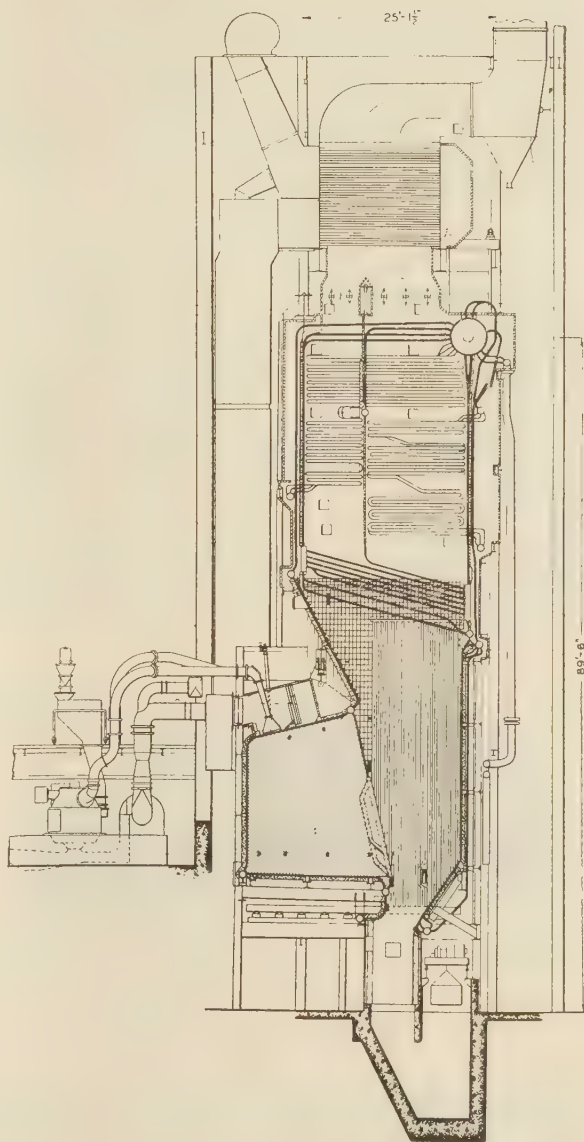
CROSS-SECTIONAL VIEW OF A HIGH-PRESSURE BOILER
